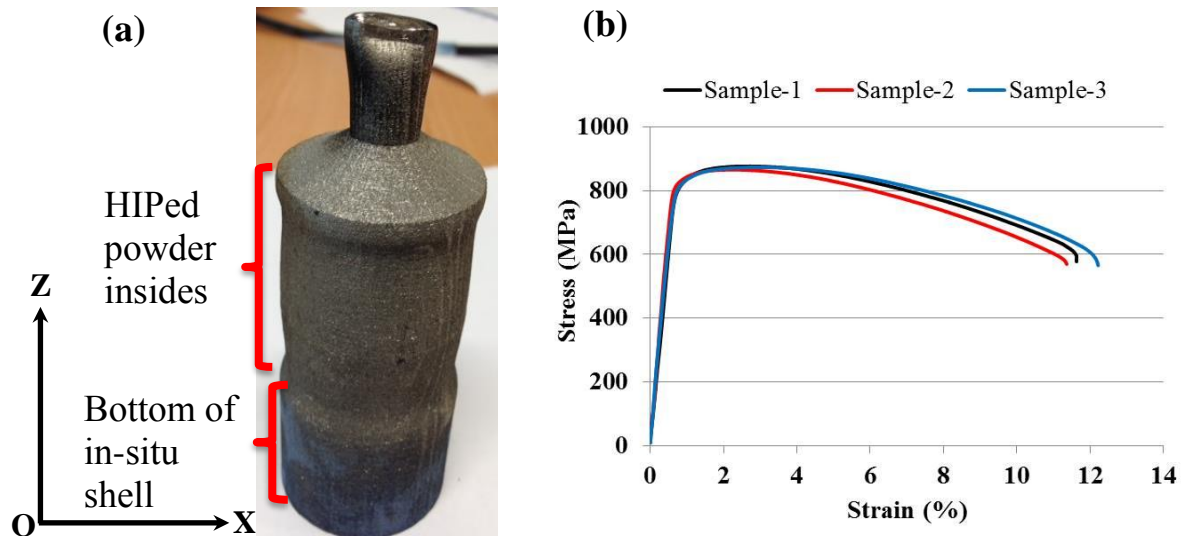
(a) Photograph of the SLMed+HIPed sample from which tensile specimens were prepared; the bottom of the tooling was purposely thickened so that the machined tensile specimens would contain half material from the tooling; (b) tensile testing results for specimens containing tooling and HIPed powder after HIPing. Sample 1, 2 and 3 were all machined along Z direction.
